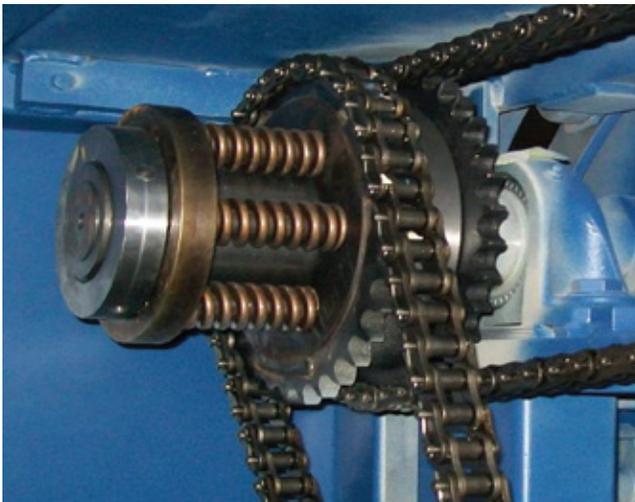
Ball clutch applied to a Handler Drive of a Charge Car.
